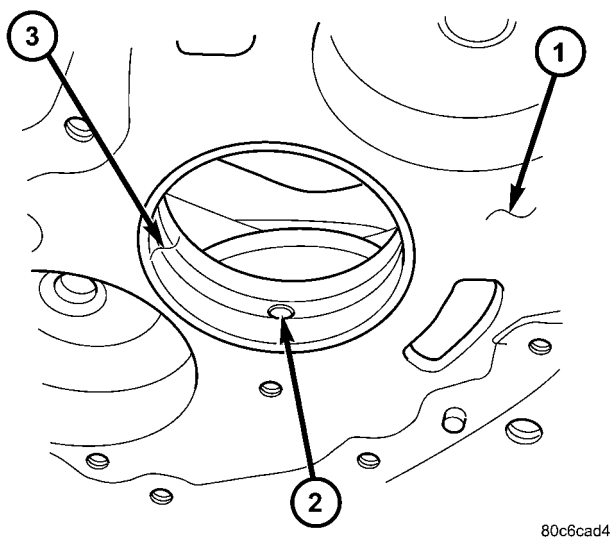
FRONT MAIN BEARING ALIGNMENT
